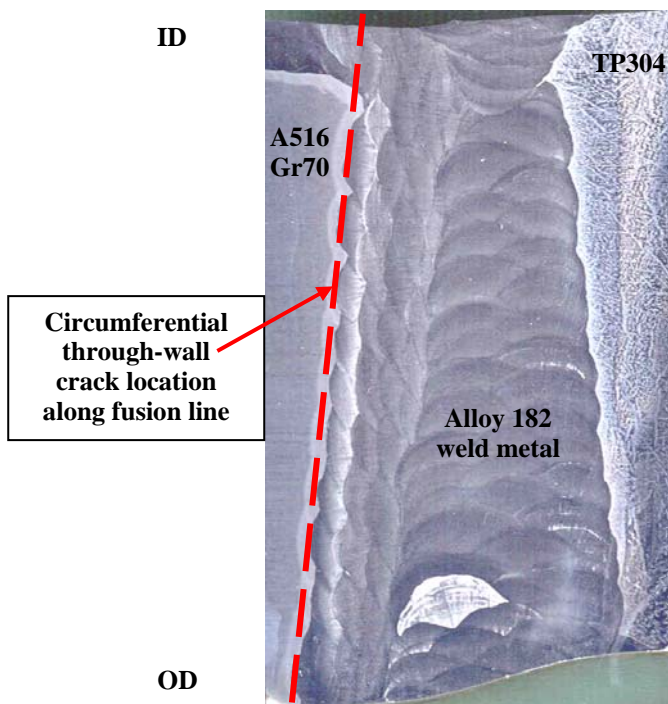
Dissimilar weld in cold-leg pipe fracture test
